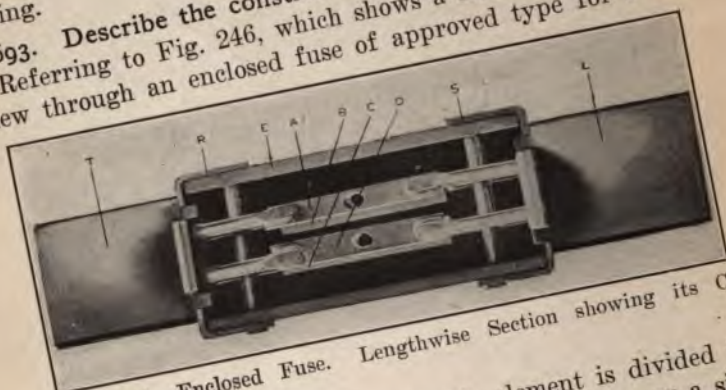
Enclosed Fuse. Lengthwise Section showing its Construction.
